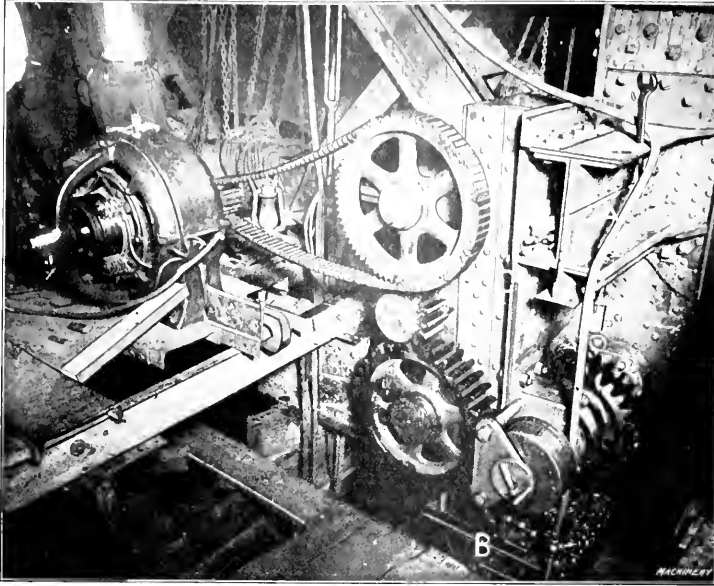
Special Boring Machine in Place on Williamsburg Suspension Bridge ready for re boring Pin Hole from 10 to 13 Inches Diameter in One Passage of Cutter-head
